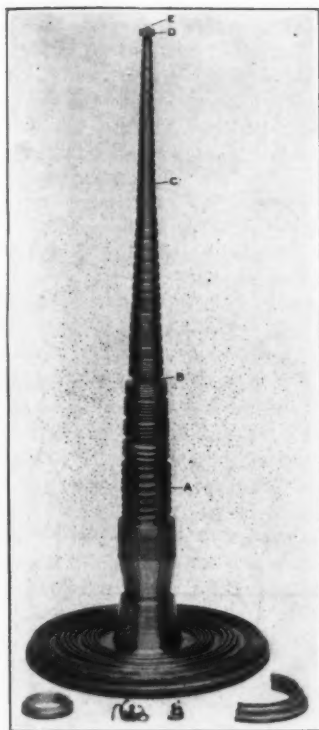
An Exhibition Piece of the Lathe's Work.
